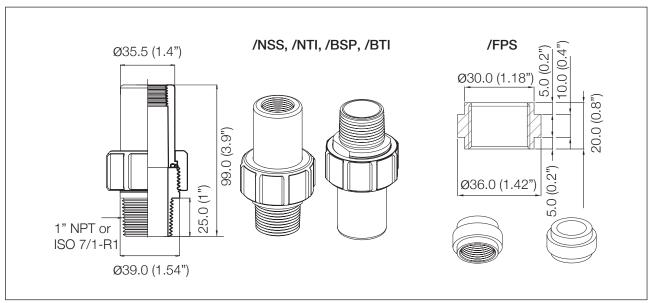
Dimensions 1" FU20-FTS adapter Stainless Steel & Titanium and FU20-FTS adapter for FF40, FS40 and FD40 fittings
